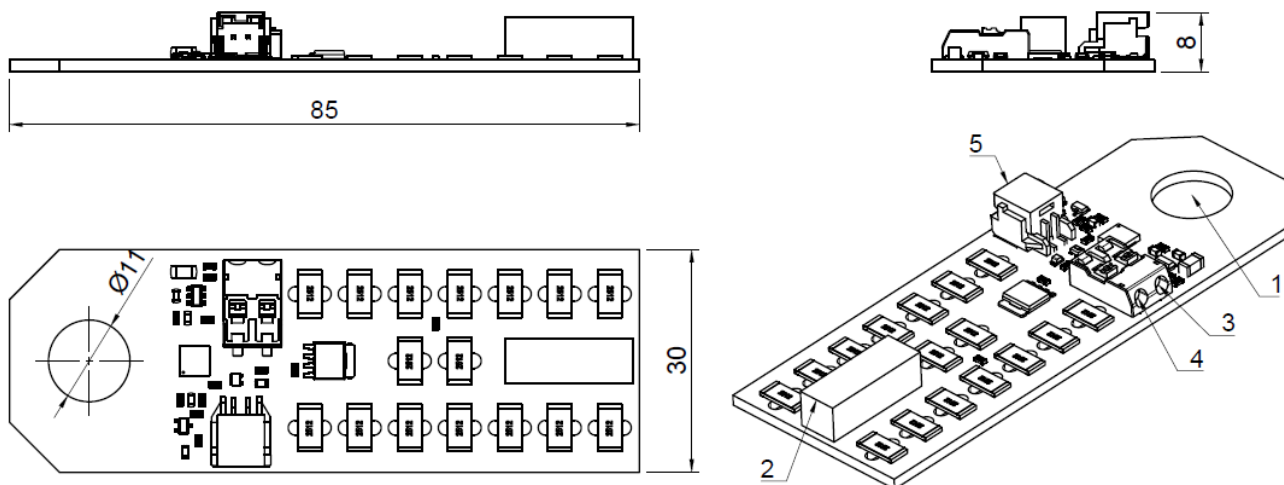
EMUS G1 Cell Module 3A (CM071A) mechanical drawing. All dimensions in millimeters
